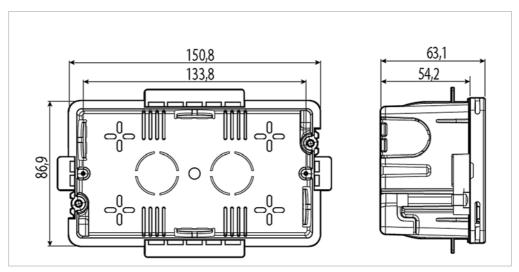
Front and side view ISYteq Touch 4.0 IC (dimensions in mm)
